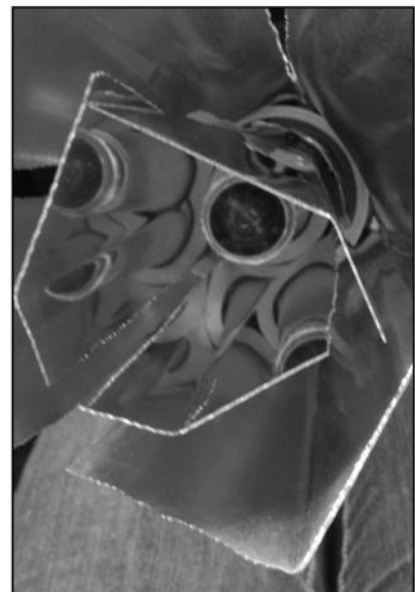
Kyla Vitek lines up the metal pieces with the shaft for drilling the holes.
